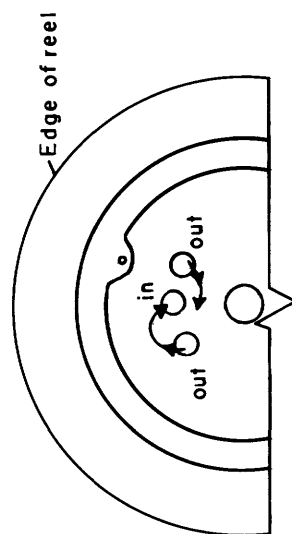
Part of right side of Iron Horse reel showing steps for attaching cable.
